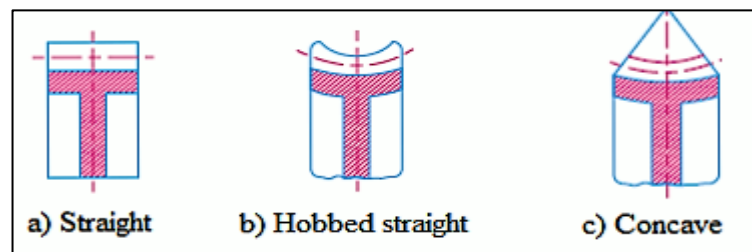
Types of wheel gears (Khurmi & Gupta, 2005)
